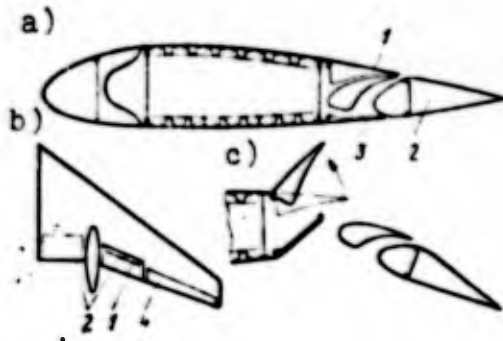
Spoiler: a) position in flight; b) placement on a wing; c) a spoiler is deployed after touchdown; 1 - spoiler; 2 - flaps; 3 - mobile cover; 4 - aileron.
